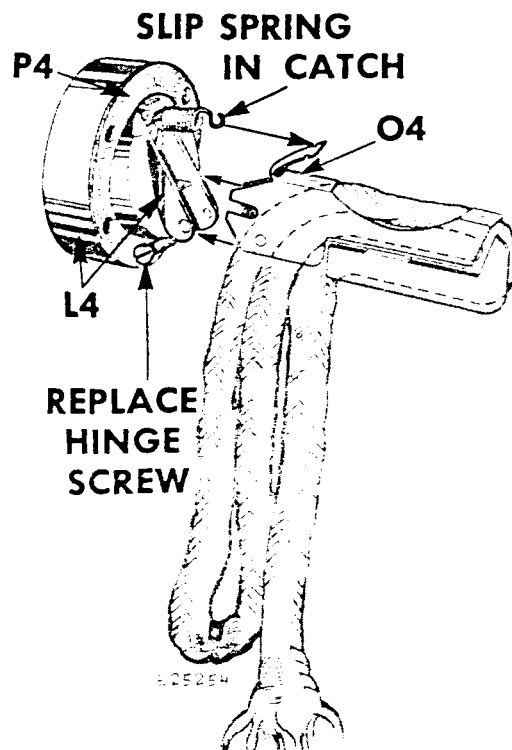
Installing New Oil-Removing Wick (with Holder) in Assembly 147056
